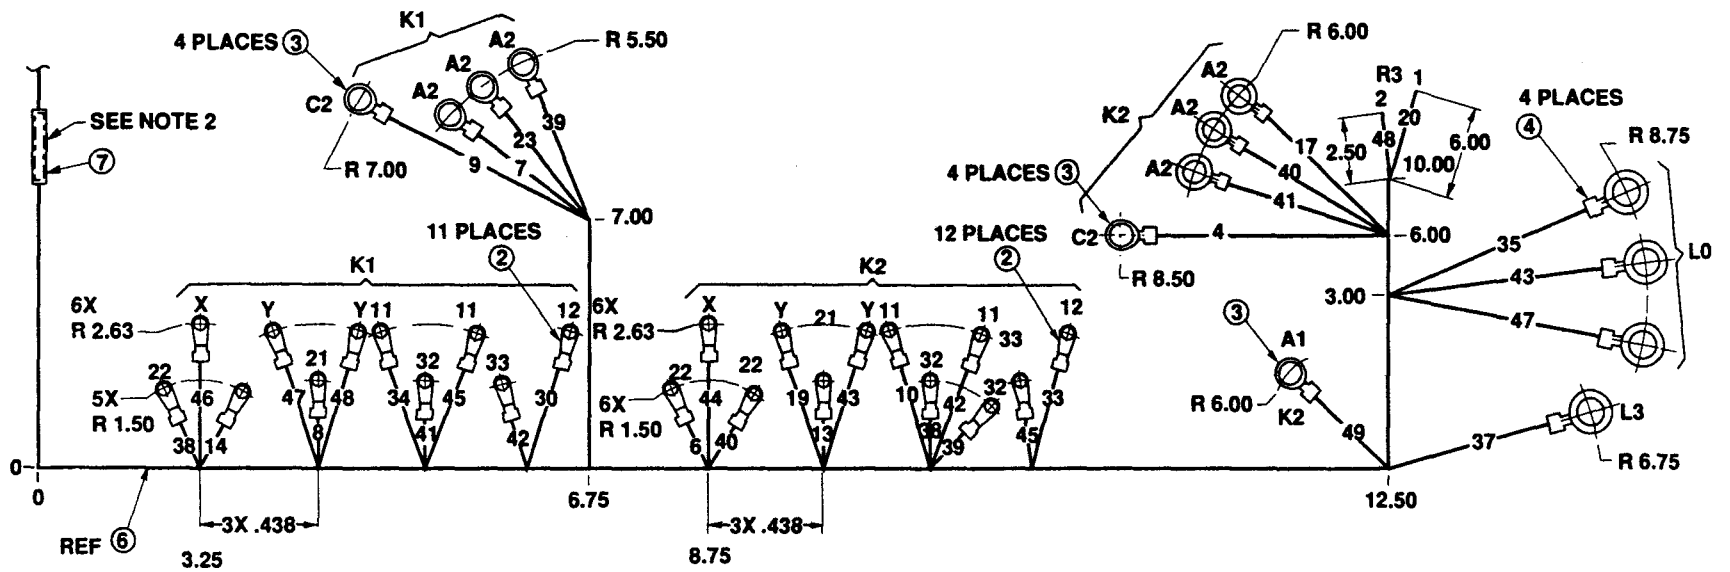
Switch Box Harness Assembly W9 (Sheet 2).
